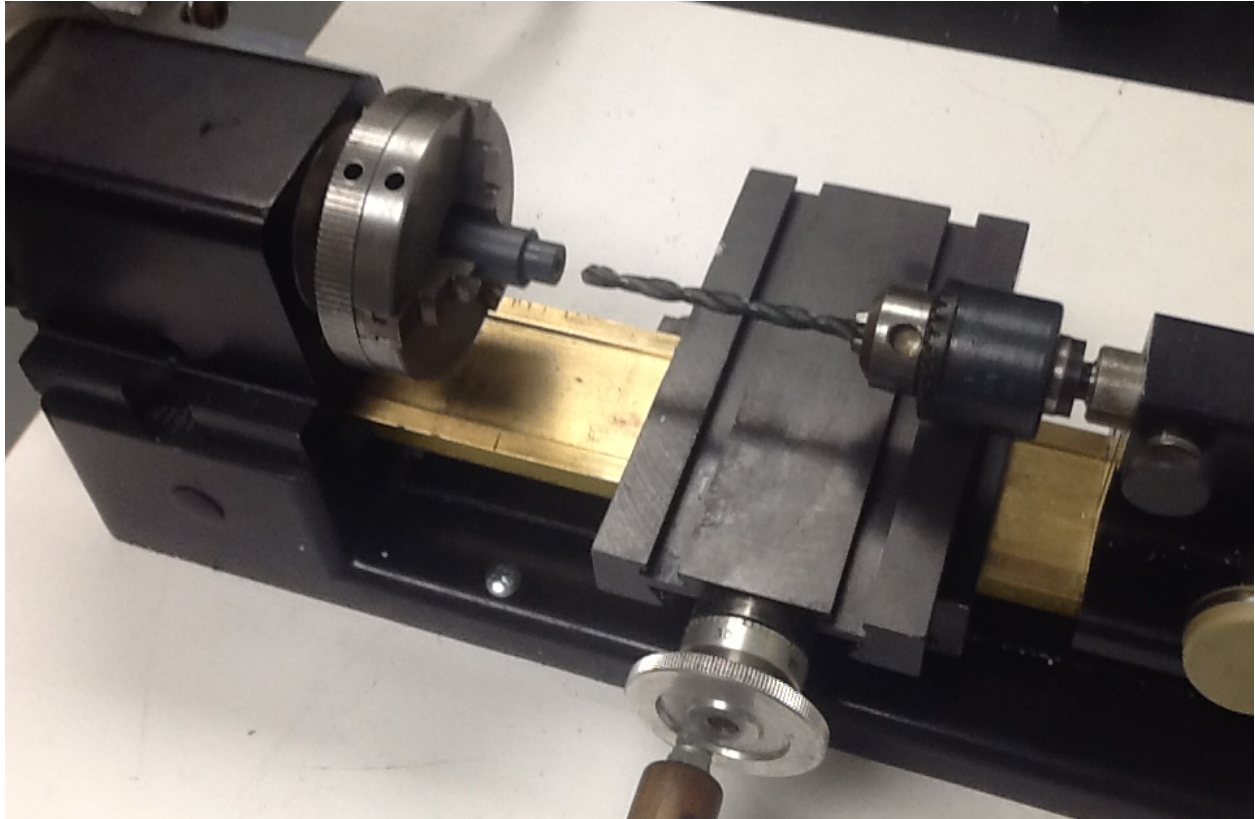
5: Fabrication of plug step 5. A 3/16" drill bit is used to center drill through the male end of the plug.
